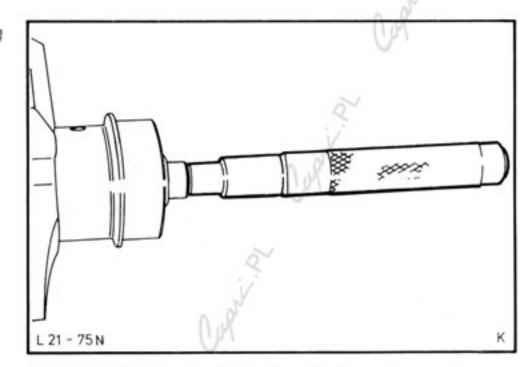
Fitting crankshaft pilot bearing using Special Tool 21-067-A.
